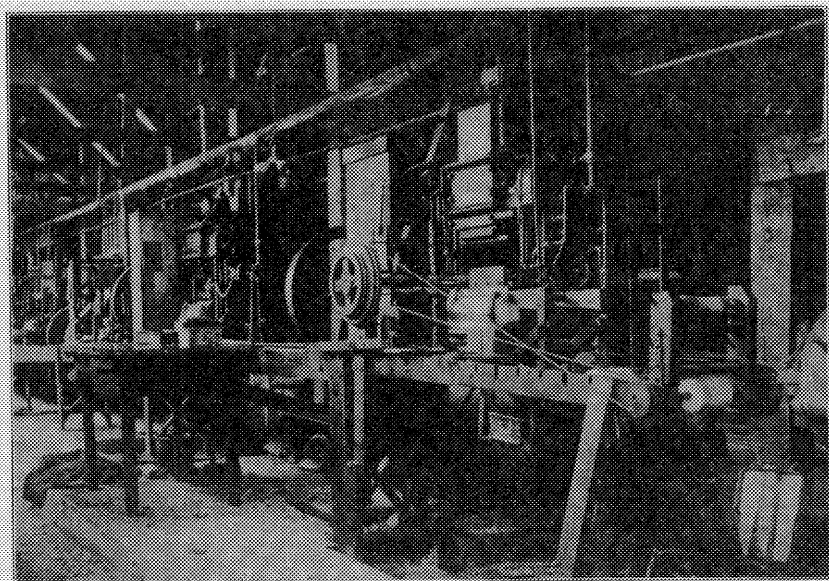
Home-made Reel Cutter for Cutting Blanks. Ludowici-Celadon Co., Alfred, N. Y.
